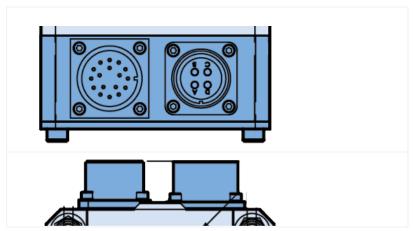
Drawing of box mount connectors used on some ServoWeld actuators. See individual encoder/connector in section 5.5 for details.
